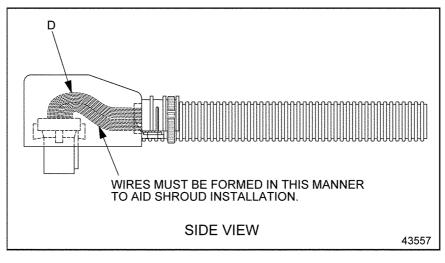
Side View of Shroud, ECU Connector and Conduit
